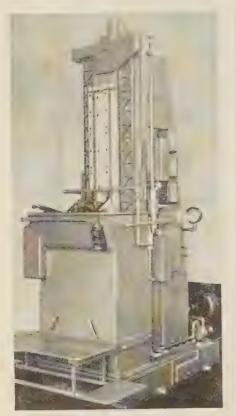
Vertical, Hydraulically Operated, Surface-Broaching Machine of the Pull Type
